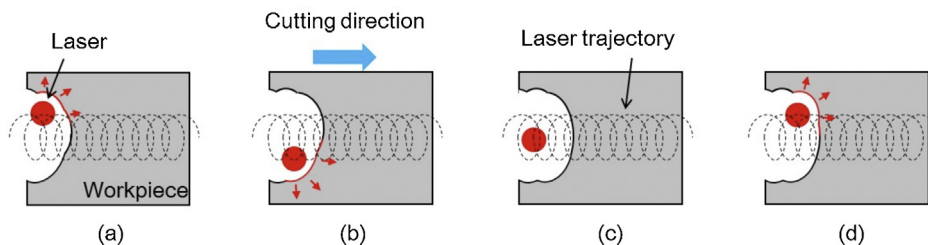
Assumption of striation formation mechanism with orbital oscillation of laser focus position (top view): (a) melting workpiece starts where laser approaches and a part of leading edge goes ahead of laser, (b) melting workpiece stops where laser leaves due to the insufficient temperature, (c) melting workpiece stops, (d) laser approaches to leading edge and restarts melting workpiece.
